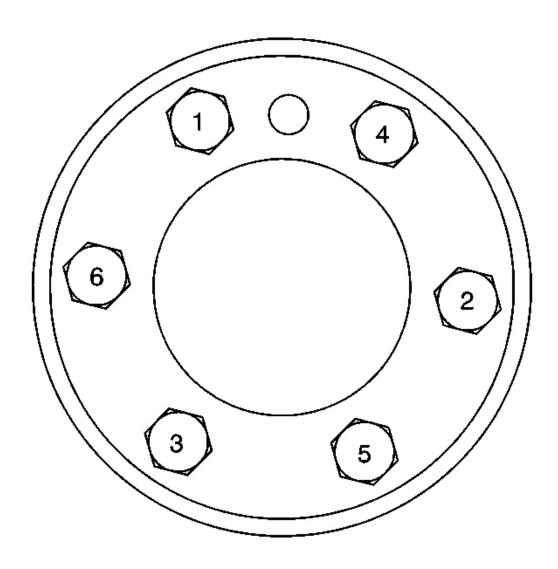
Flywheel Bolt Tightening Sequence Courtesy of GENERAL MOTORS CORP.
